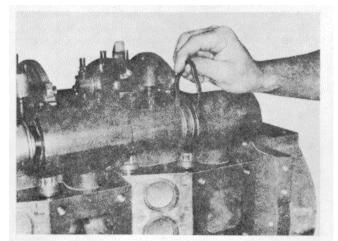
N-55. Install the Water Transfer Tube Retaining Ring
